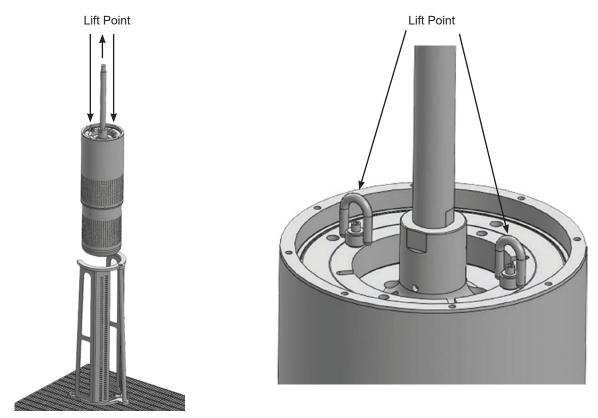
Lift Plug Subassembly, Cage and Diffuser
